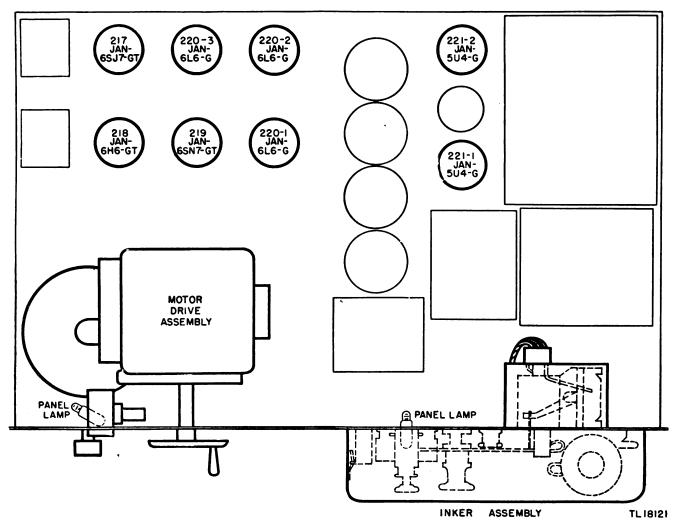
Location of recorder tubes, panel lamps, motor drive assembly, and inker assembly.
